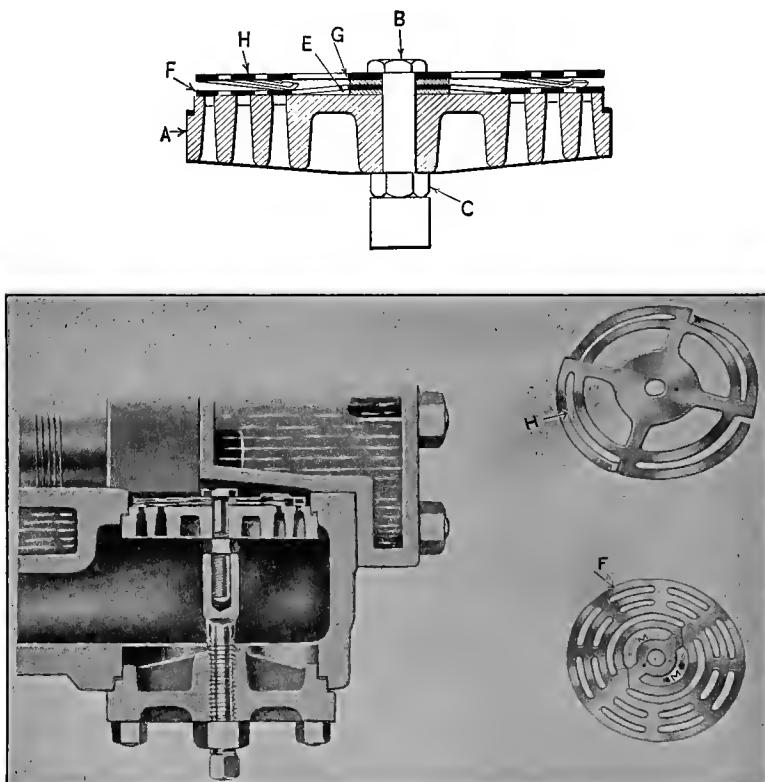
Section Showing Inlet Valve in the Air Cylinder of a Modern Ingersoll-Rand Compressor.
